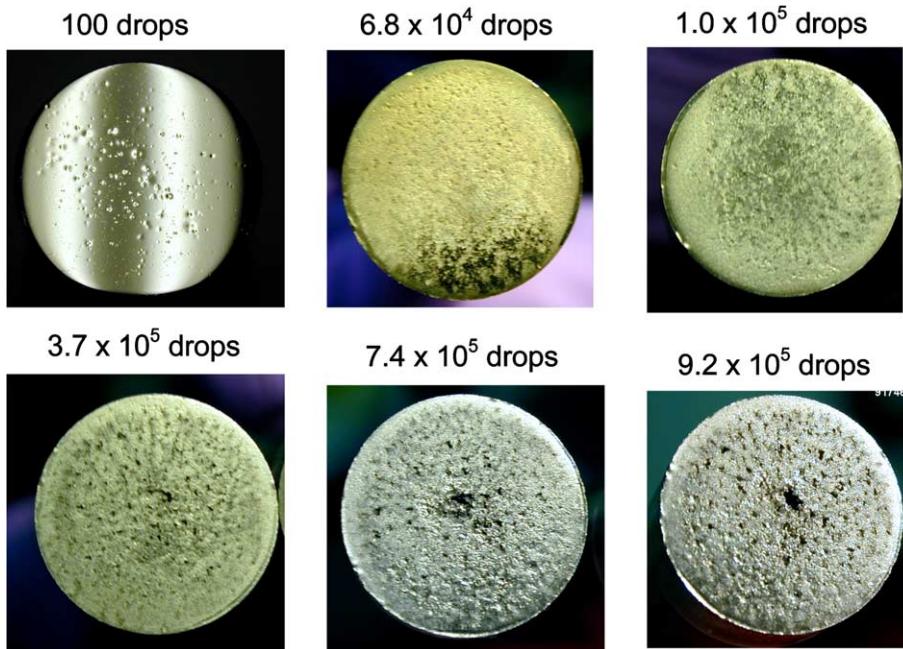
Photographs showing the progression of pitting damage for a drop test specimen (upper sample position) up to almost one million cycles.
